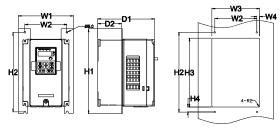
Flange installation diagram of 7.5kW–15kW single-VFD integrated machine Table A-4 Flange installation dimension of 7.5kW–15kW single-VFD integrated machine (mm)
